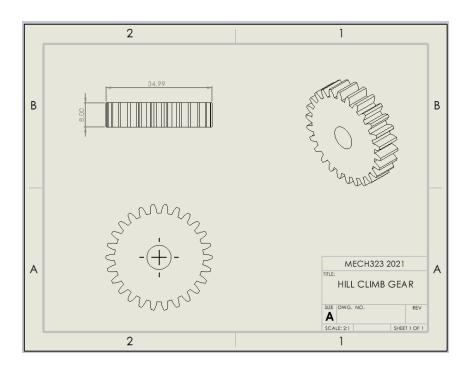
CAD drawing of the gear component of the hill climb gear pairing.
